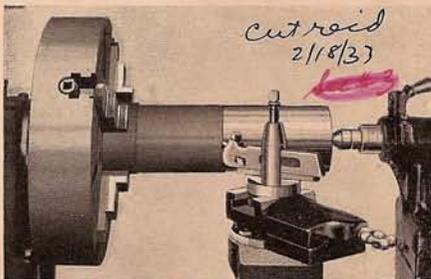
Finishing a Cast Iron Cylinder Sleeve for press fit in Cylinder Block.
